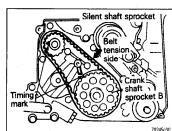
Silent shaft alignment marks. Notice the tension side of the inner (silent shaft) belt-2.4L engine
